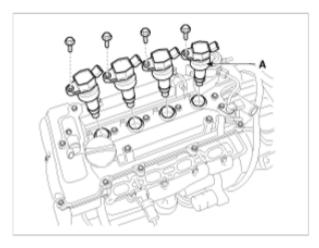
Identifying Ignition Coils Courtesy of HYUNDAI MOTOR AMERICA
